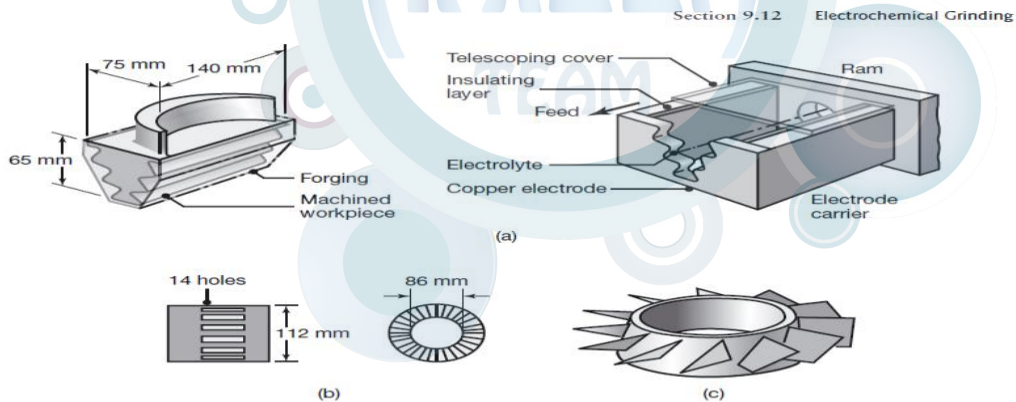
Typical parts made by electrochemical machining. (a) Turbine blade made of a nickel alloy, 360 HB; the part on the right is the shaped electrode. *Source:* ASM International. (b) Thin slots on a 4340-steel roller-bearing cage. (c) Integral airfoils on a compressor disk.
